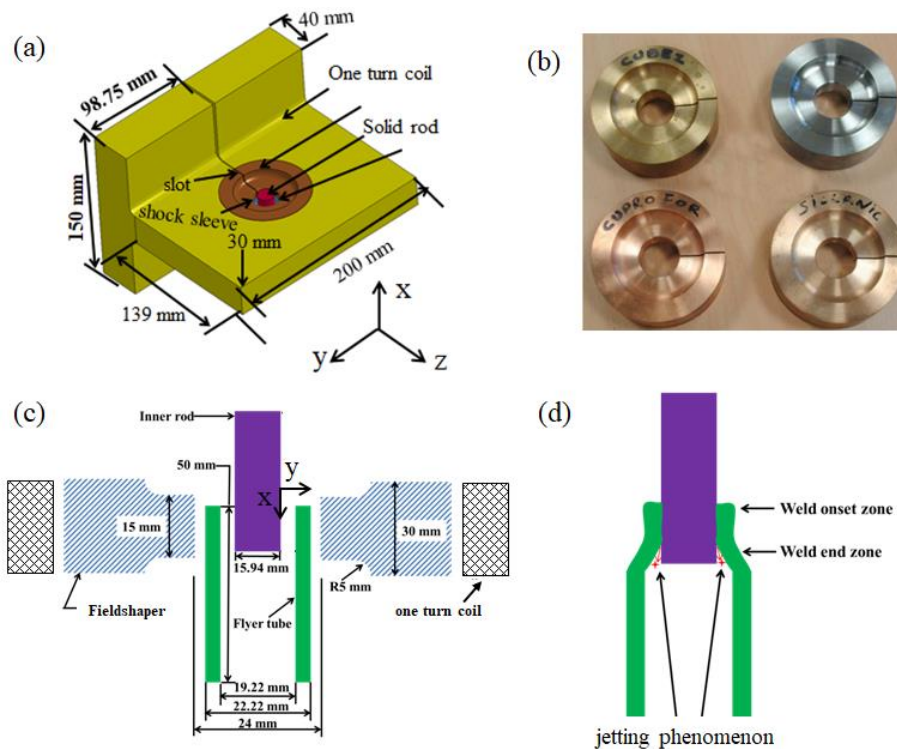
Schematic illustrations of MPW process: (a) 3D isometric projection of the MPW assembly; (b) four different FS used for the MPW tests: CuBe2, Steel, Cuprofor, Siclanic; a cross-section view of workpieces assembly (c) prior to the welding and (d) during the collision propagation.
